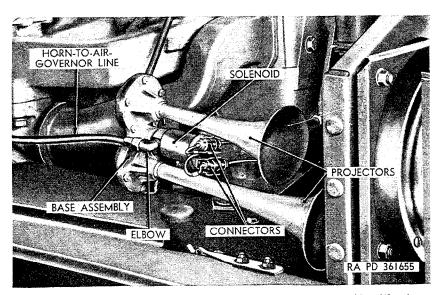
Horn installed on right front fender (solenoid without mounting brackets).
